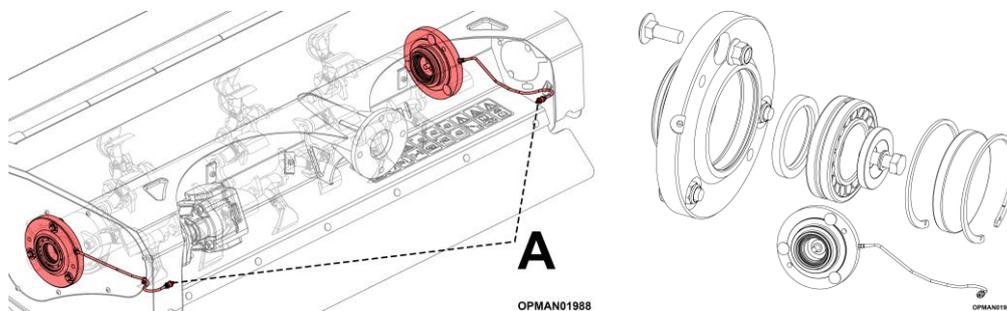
Powerdrive Pro Rotor Shaft Bearing Housings
